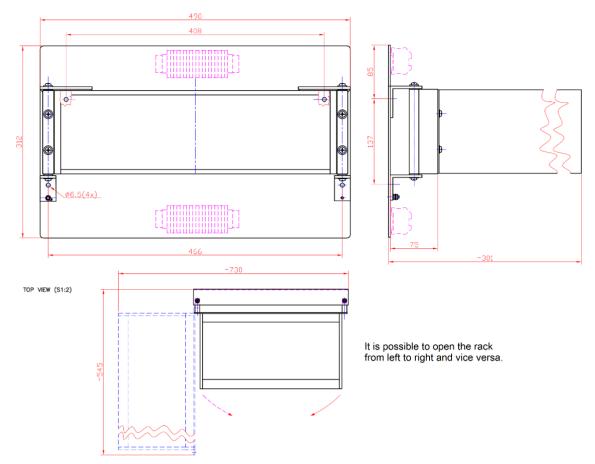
Dimensions for wall mounting of 84 HP devices (upper and lower terminals)
